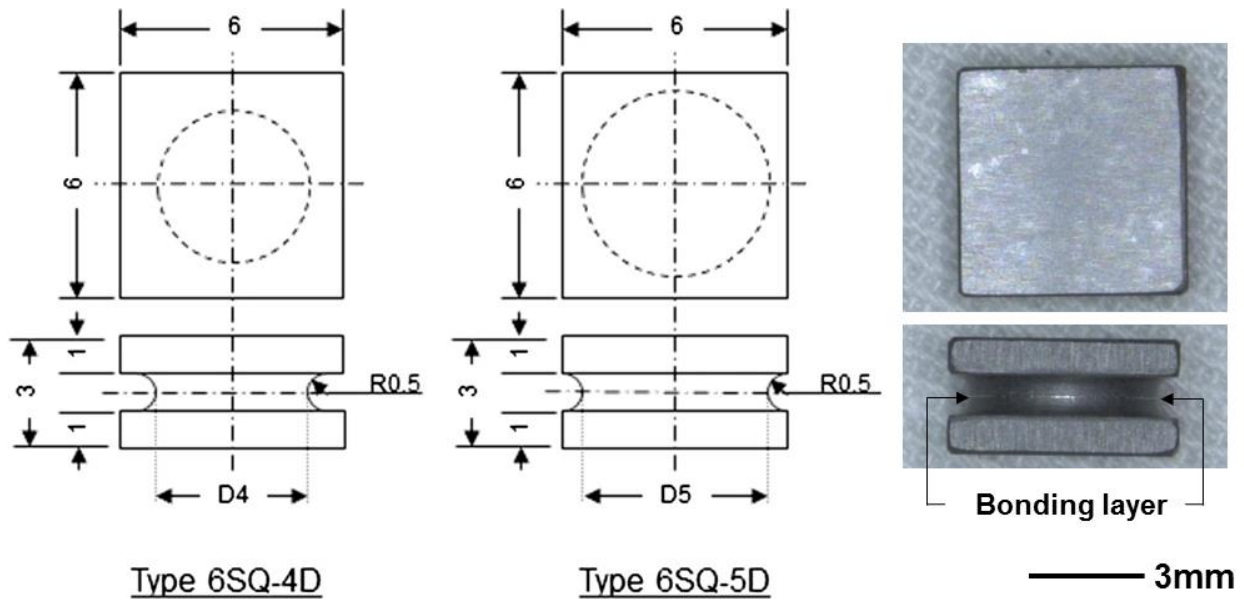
Drawing of 6SQ-4D and -5D torsion specimens, and appearance of machined Ti foil bonded SiC. Unite of drawing is mm.
